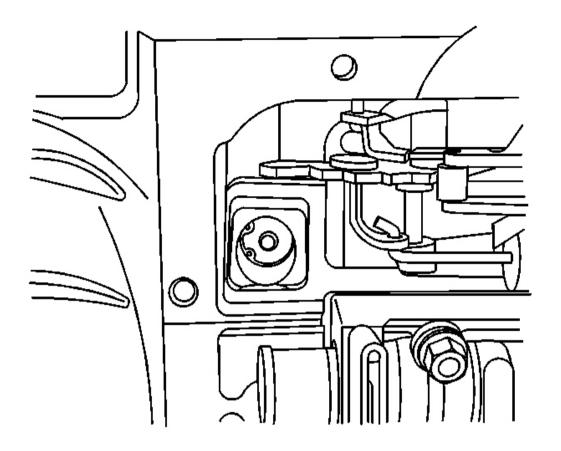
Locating Reverse Boost Valve Courtesy of GENERAL MOTORS CORP.
